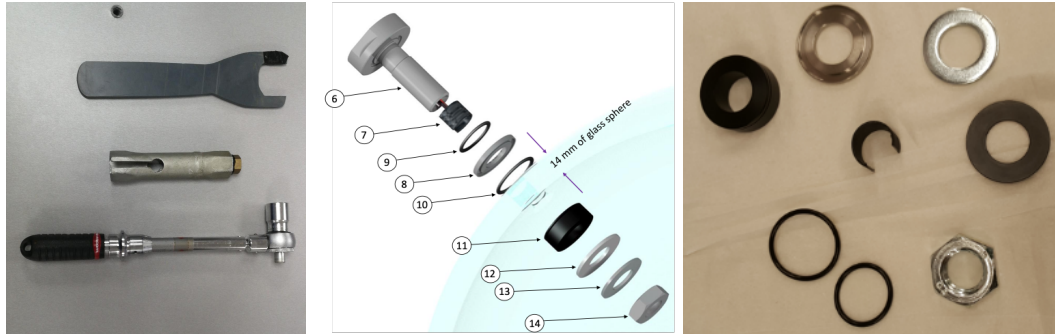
The tools used to mount the penetrator in the left, and parts used to prevent any leak on the right. The middle picture shows the order of which the parts are to be installed.
